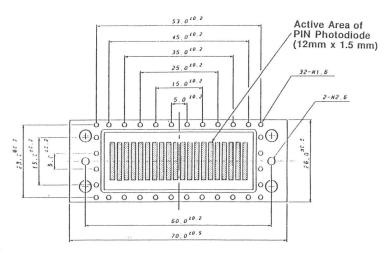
Geometrical structure of the front surface of a linear array of 20 PIN photodiodes, where it is shown in mm units.
